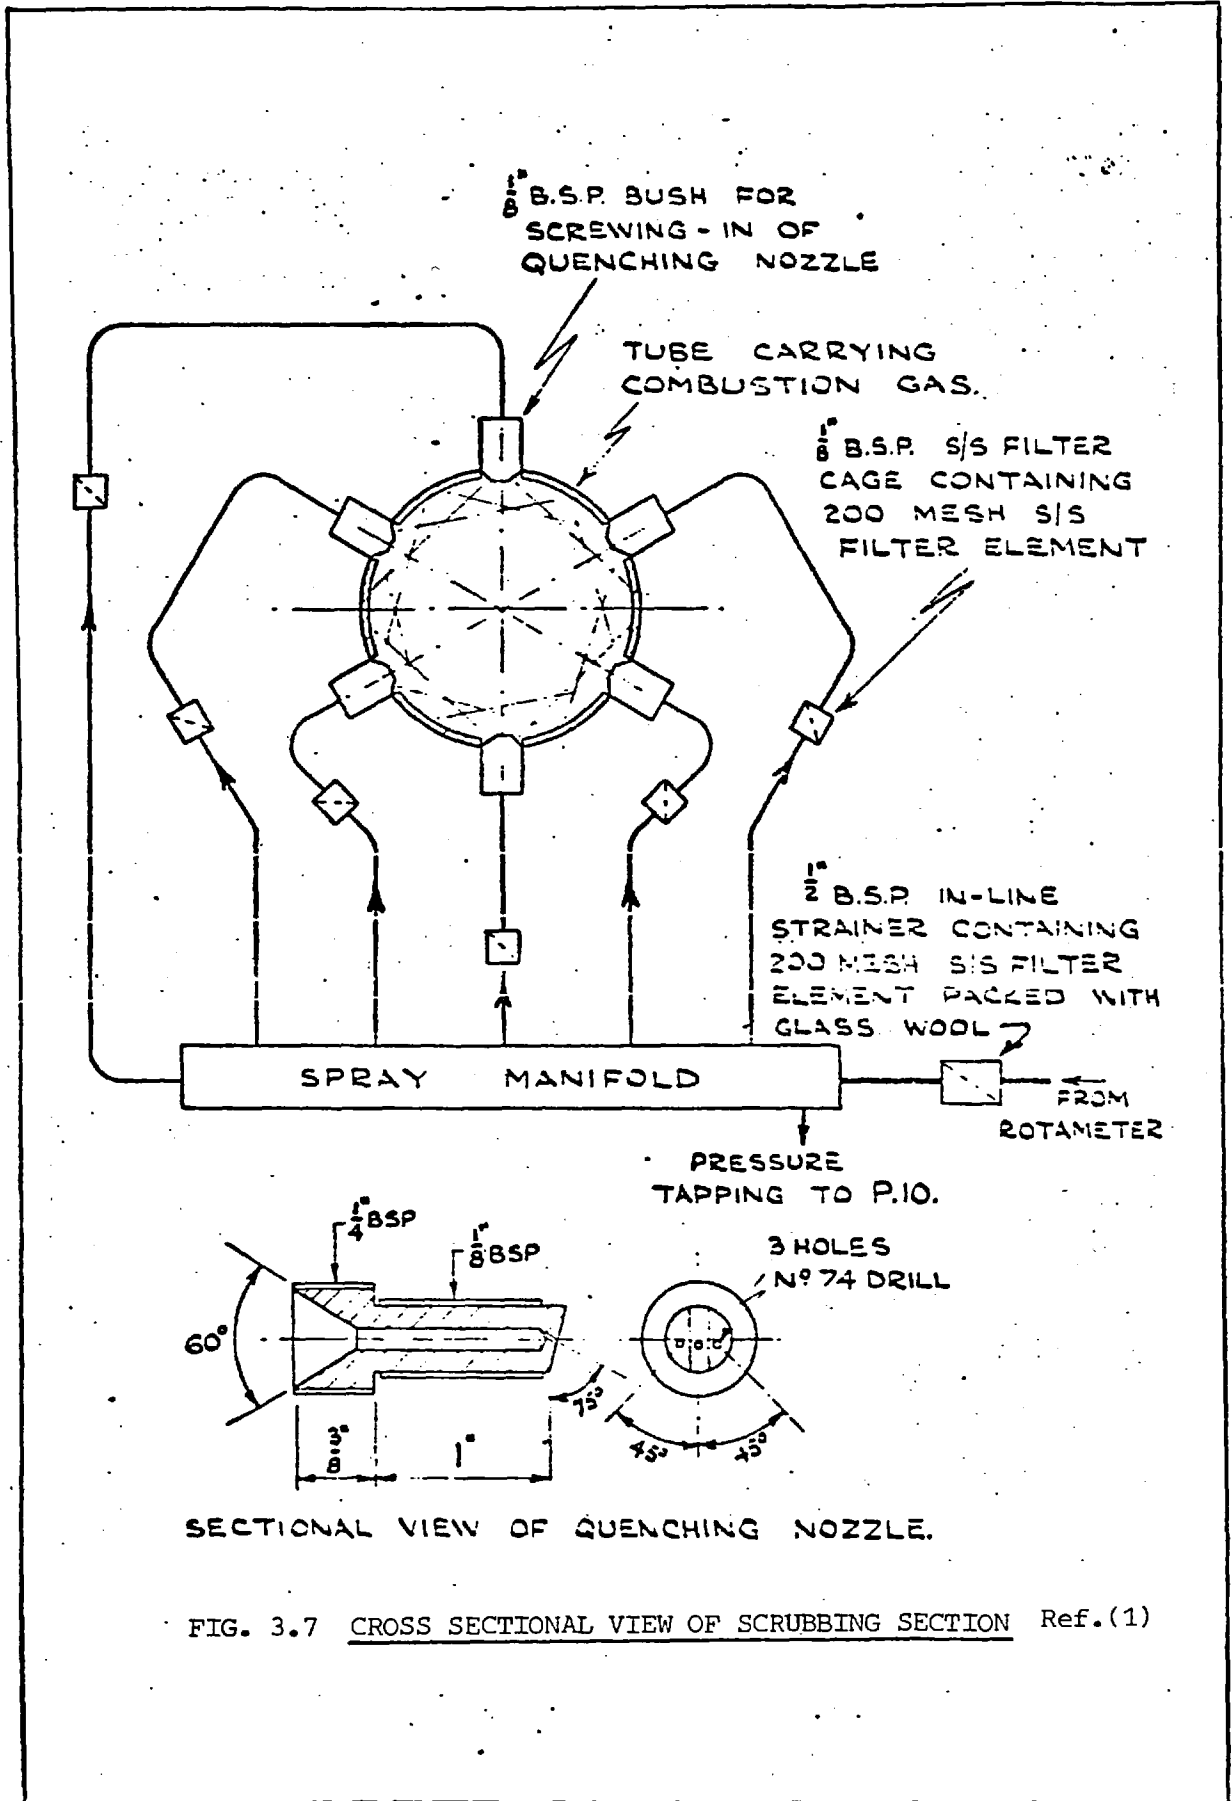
CROSS SECTIONAL VIEW OF SCRUBBING SECTION Ref.(1)
